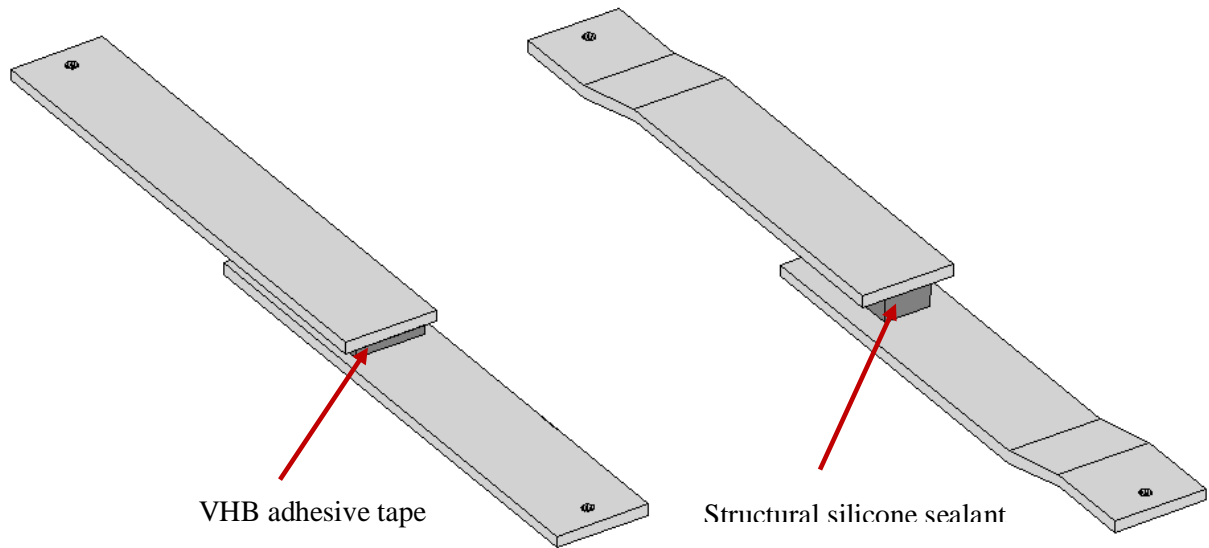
Single-lap shear joint specimens, modified for mounting in test frame.
